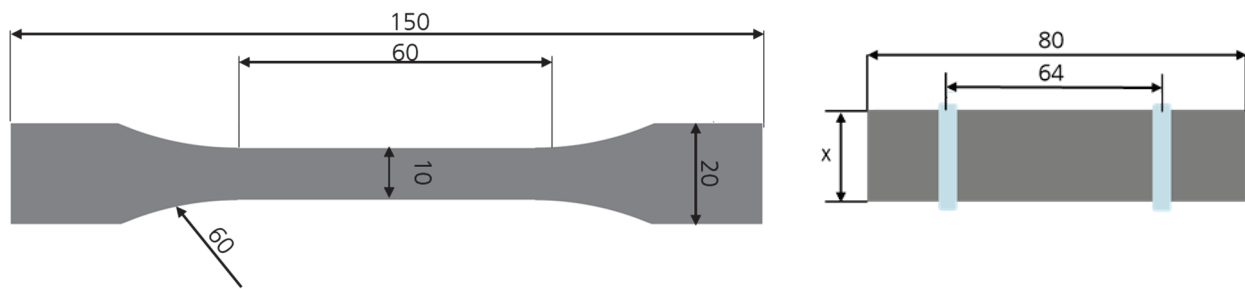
Dimensions of the fused granular fabrication tensile (left) and bending test specimen (right).
